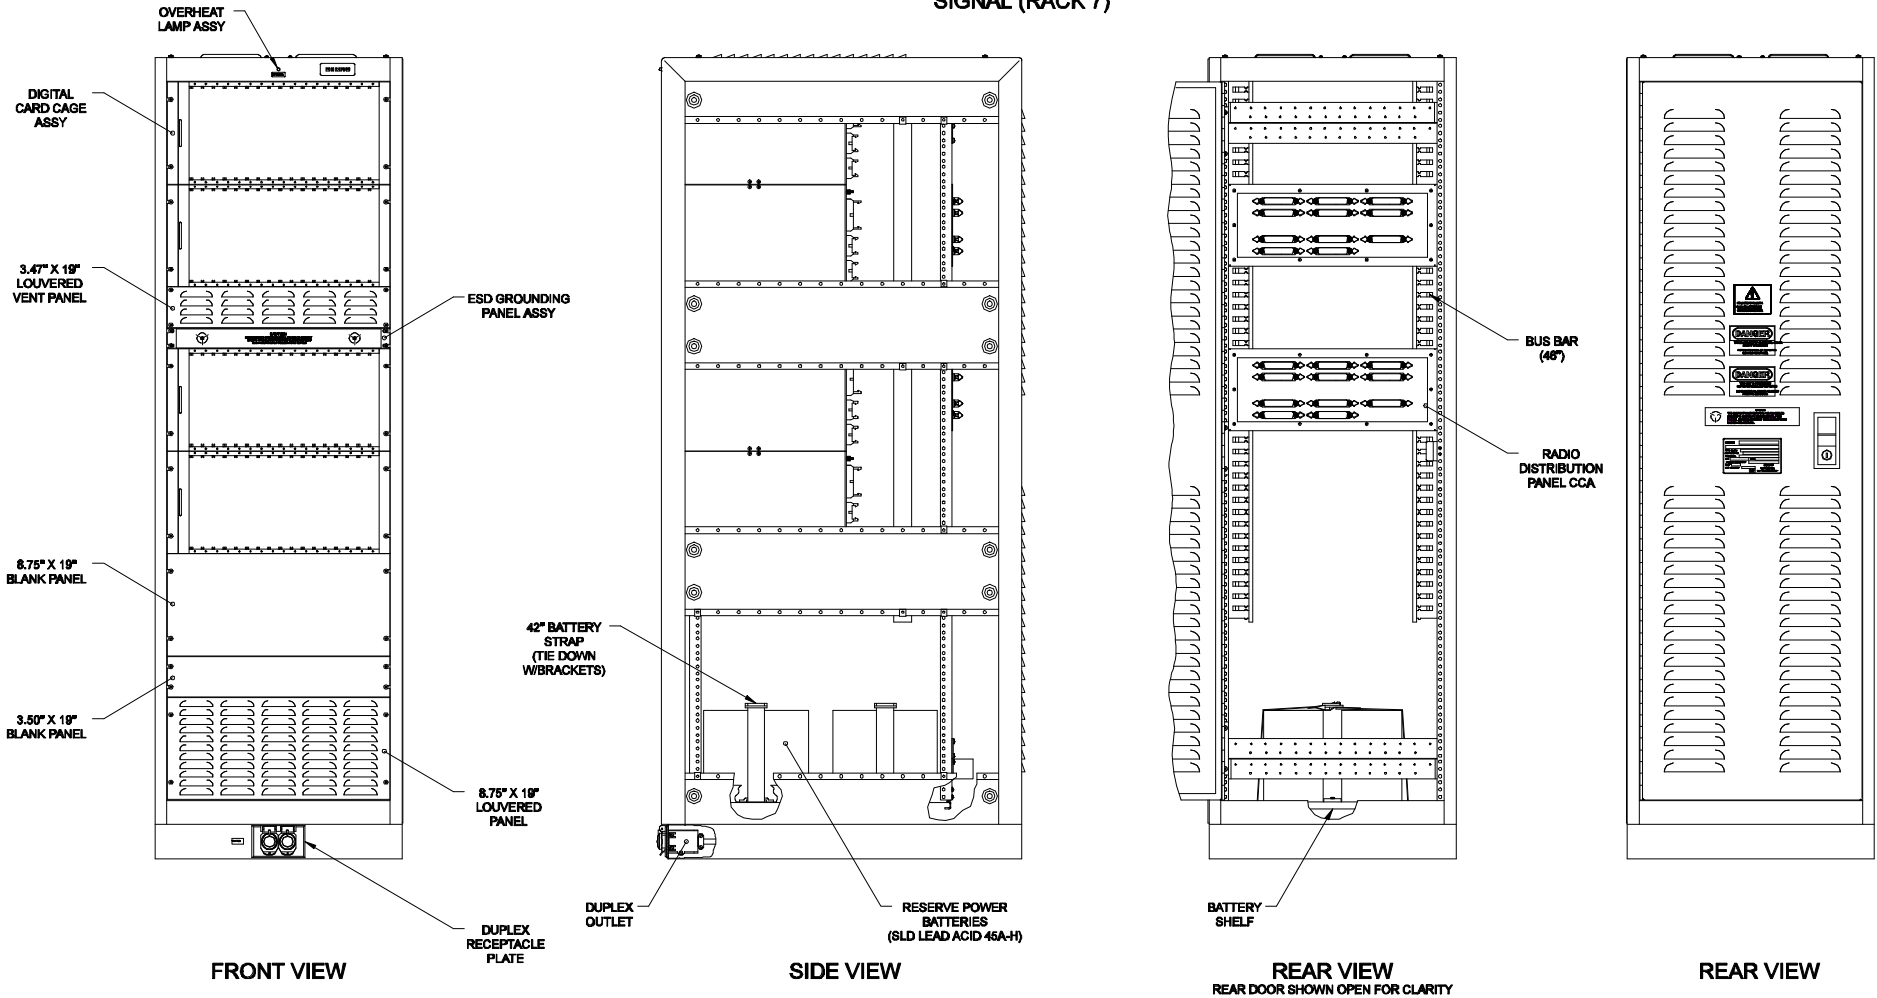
Basic ETVS System 4 (BS-4); Racks 1-7; Front, Side, and Rear Views (Sheet 7 of 7)
